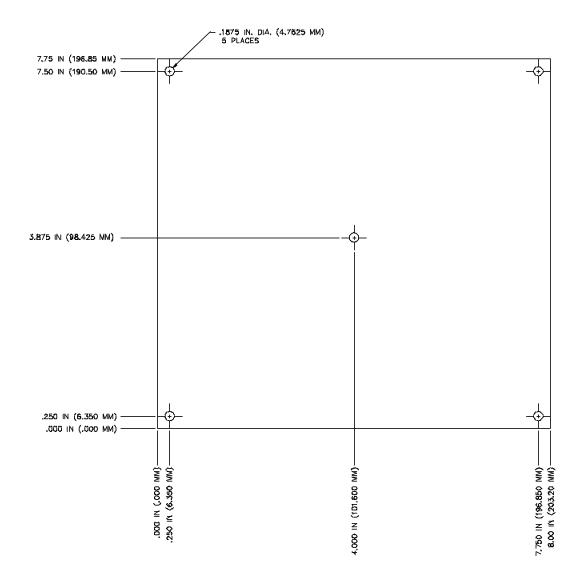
Mounting Holes for The 16 Position I/O Board
